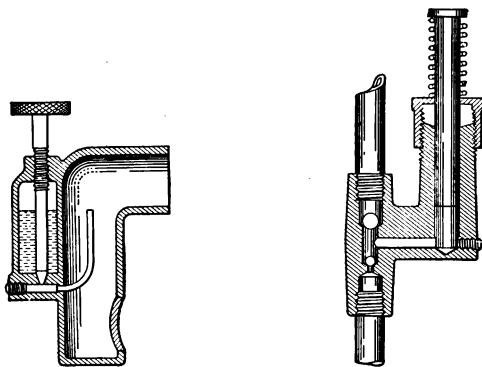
Carbureter and Fuel Pump, Novo Engine.
